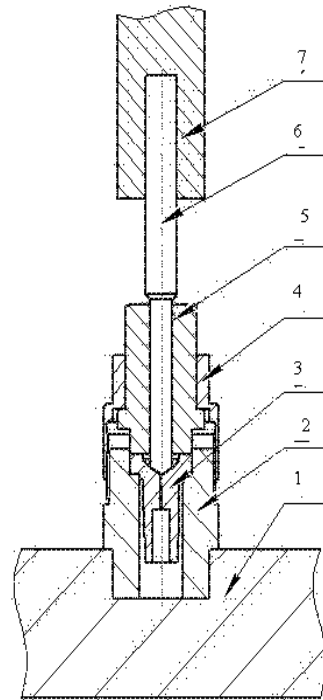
Equipment for reconstruction the Bosch electrohydraulic injector shut-off valves; 1) Thrust plate; 2) Housing; 3) Valve seat; 4) Nut; 5) Guide space plate; 6) Lapping plate and 7) Chuck
